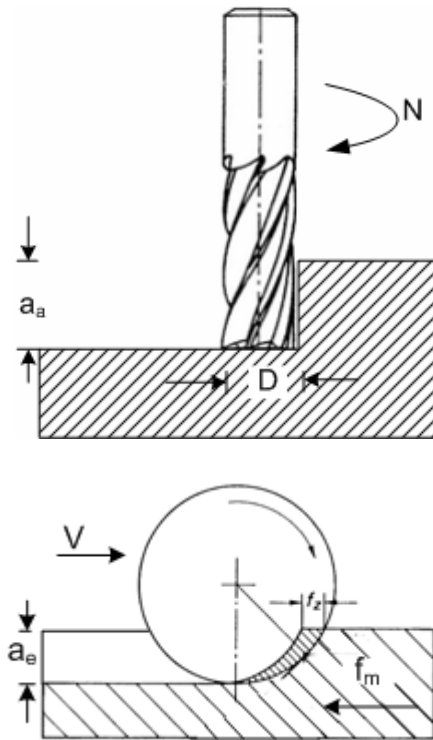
Basic Geometry of an End Milling Process (Down Milling)
